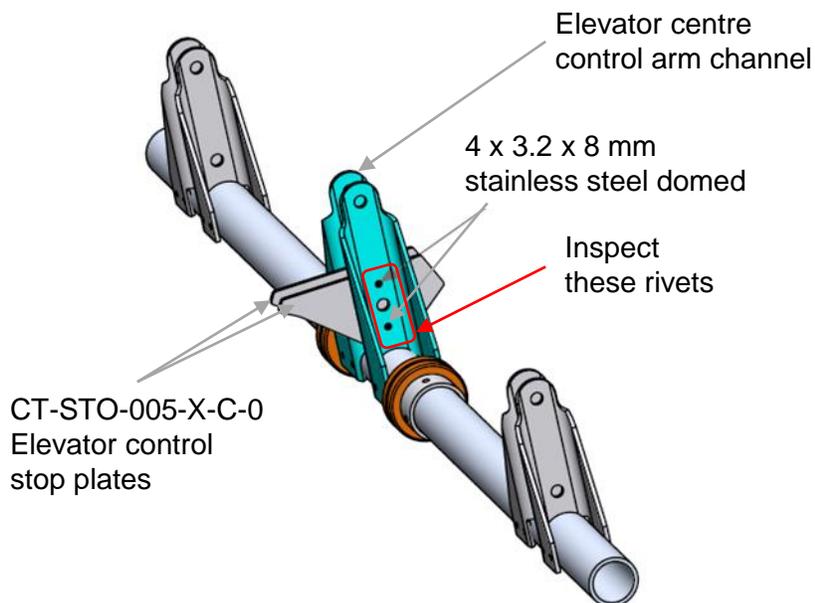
Elevator control torque tube for Sling 4 and Sling 4 TSi aircraft
